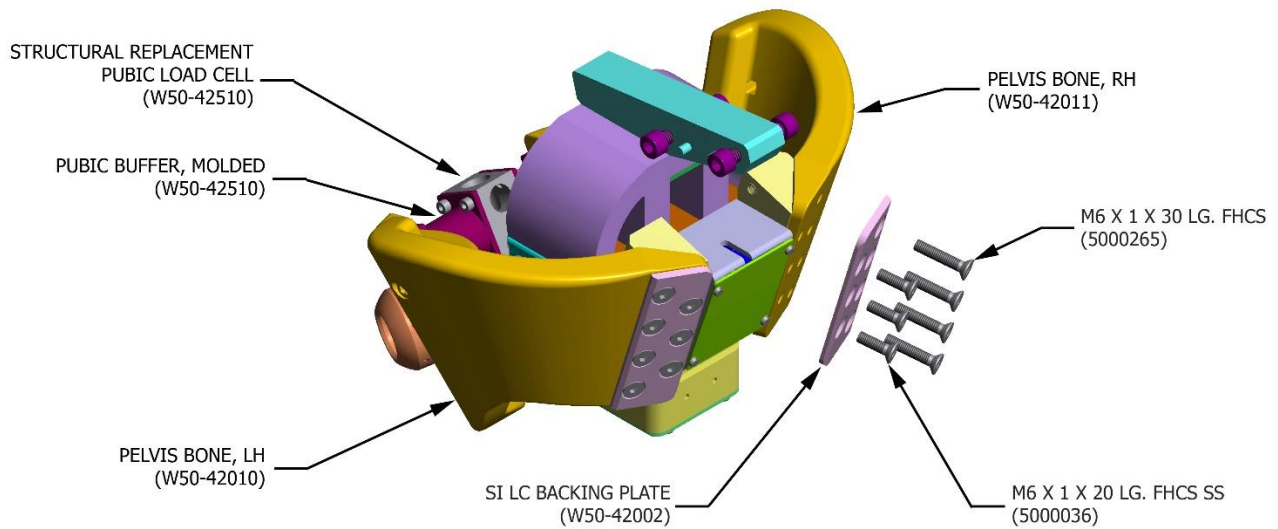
Removing sacroiliac backing plates to separate the pelvic bone-pubis assembly.
